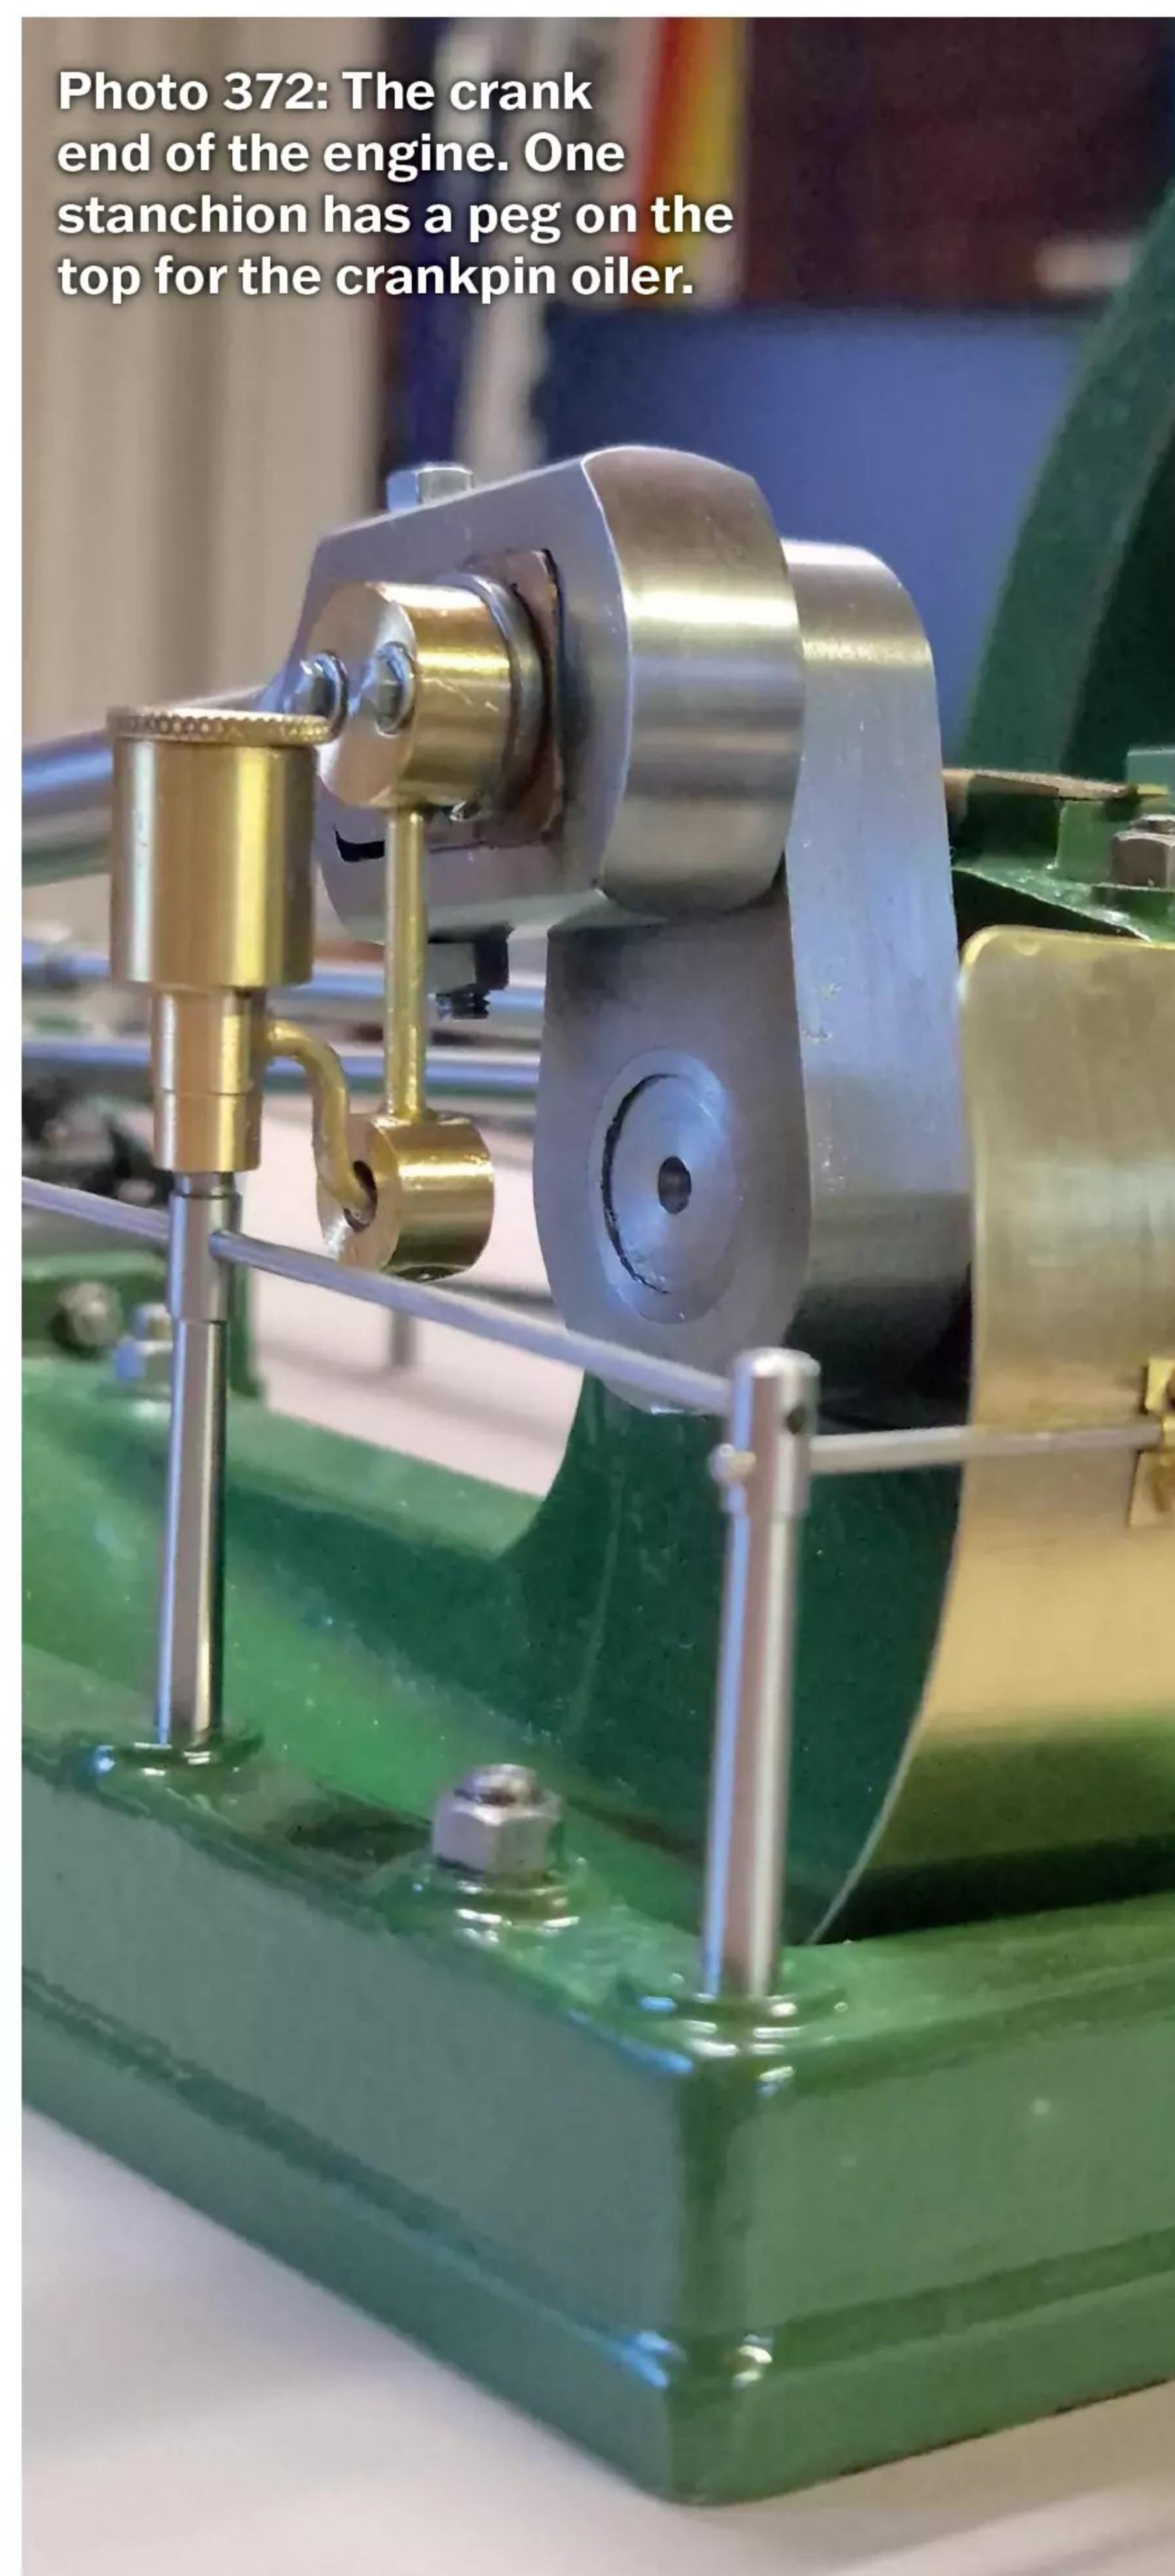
The crank end of the engine. One stanchion has a peg on the top for the crankpin oiler.
